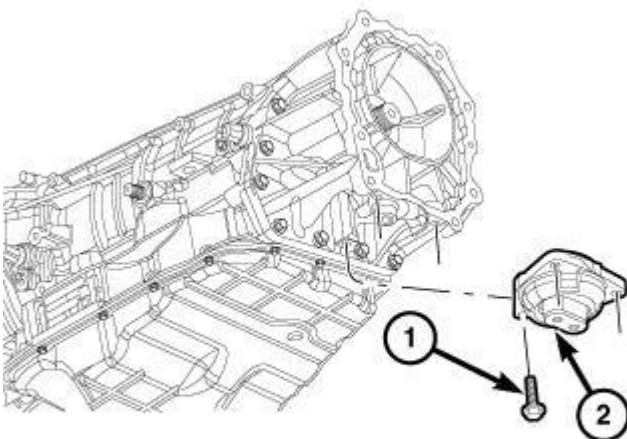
Rear Engine Mount Isolator & Retaining Bolts
